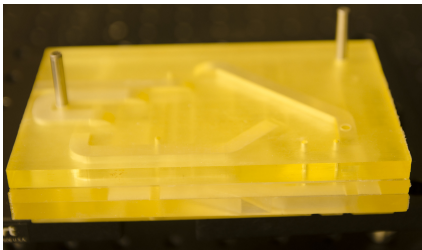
Assembled knot-tying fixture for shoelace (un)knot.
